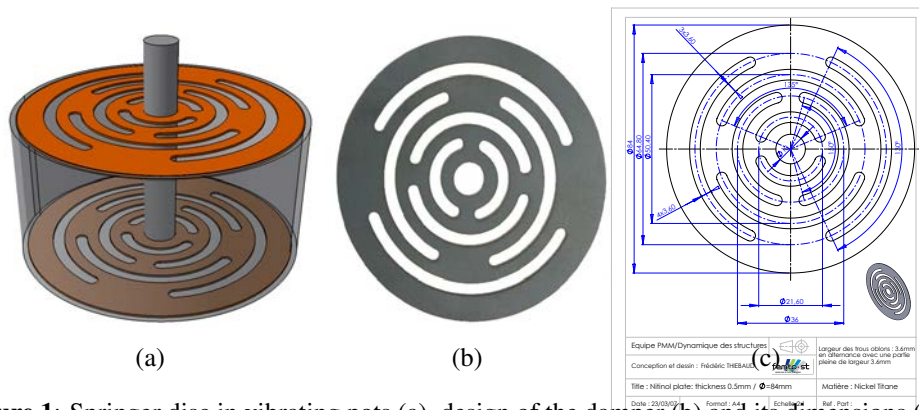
Springer disc in vibrating pots (a), design of the damper (b) and its dimensions (c).
